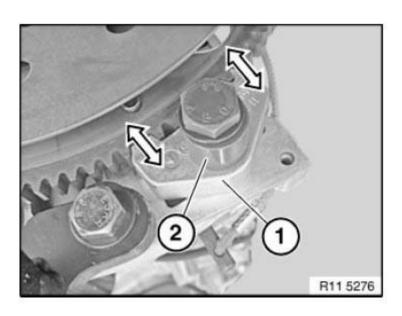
Rotating Engine At Central Bolt Using Special Tool (11 0 300) Courtesy of BMW OF NORTH AMERICA, INC.
